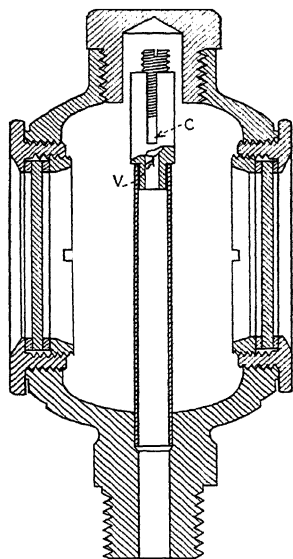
Oiler for crankpins and other rotary-motion bearings.
